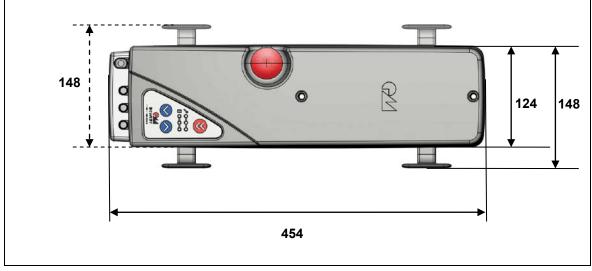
Dimensions of the ACCUCONTROL, top view (in mm)
